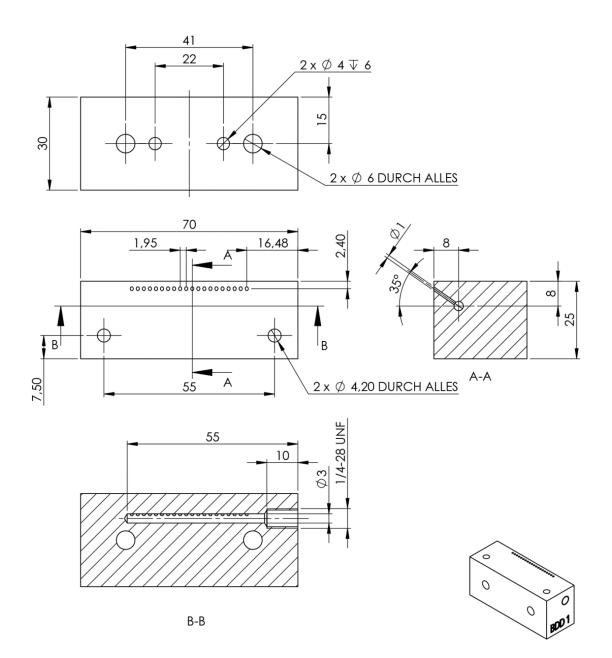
Technical drawing of the Teflon caps. All numbers in mm.
